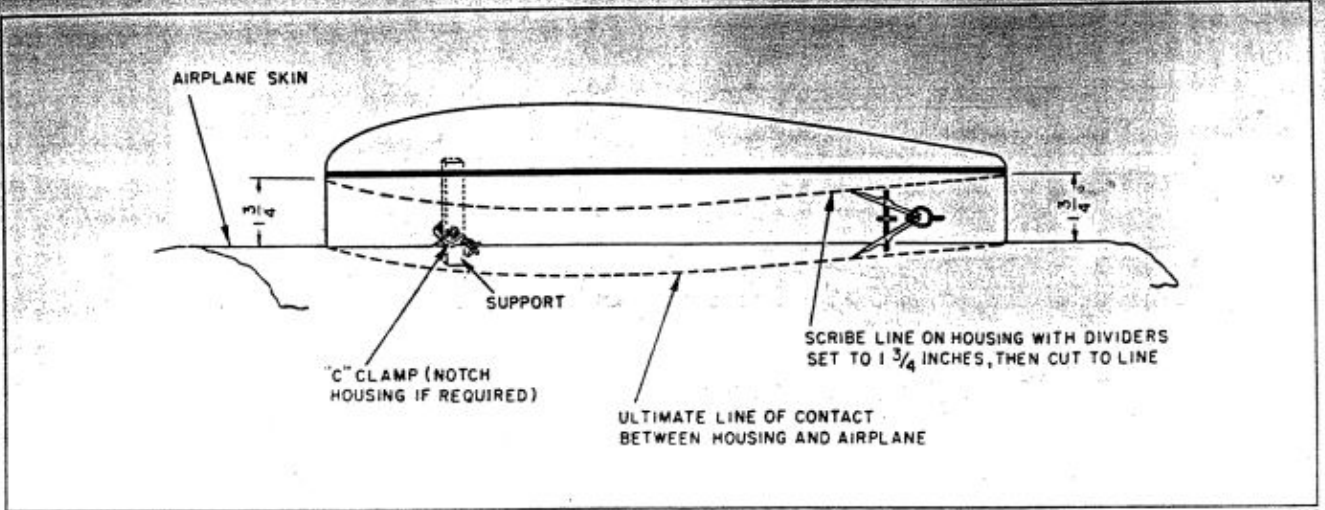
Fitting Housing ARC-17764 to Mounting Surface
